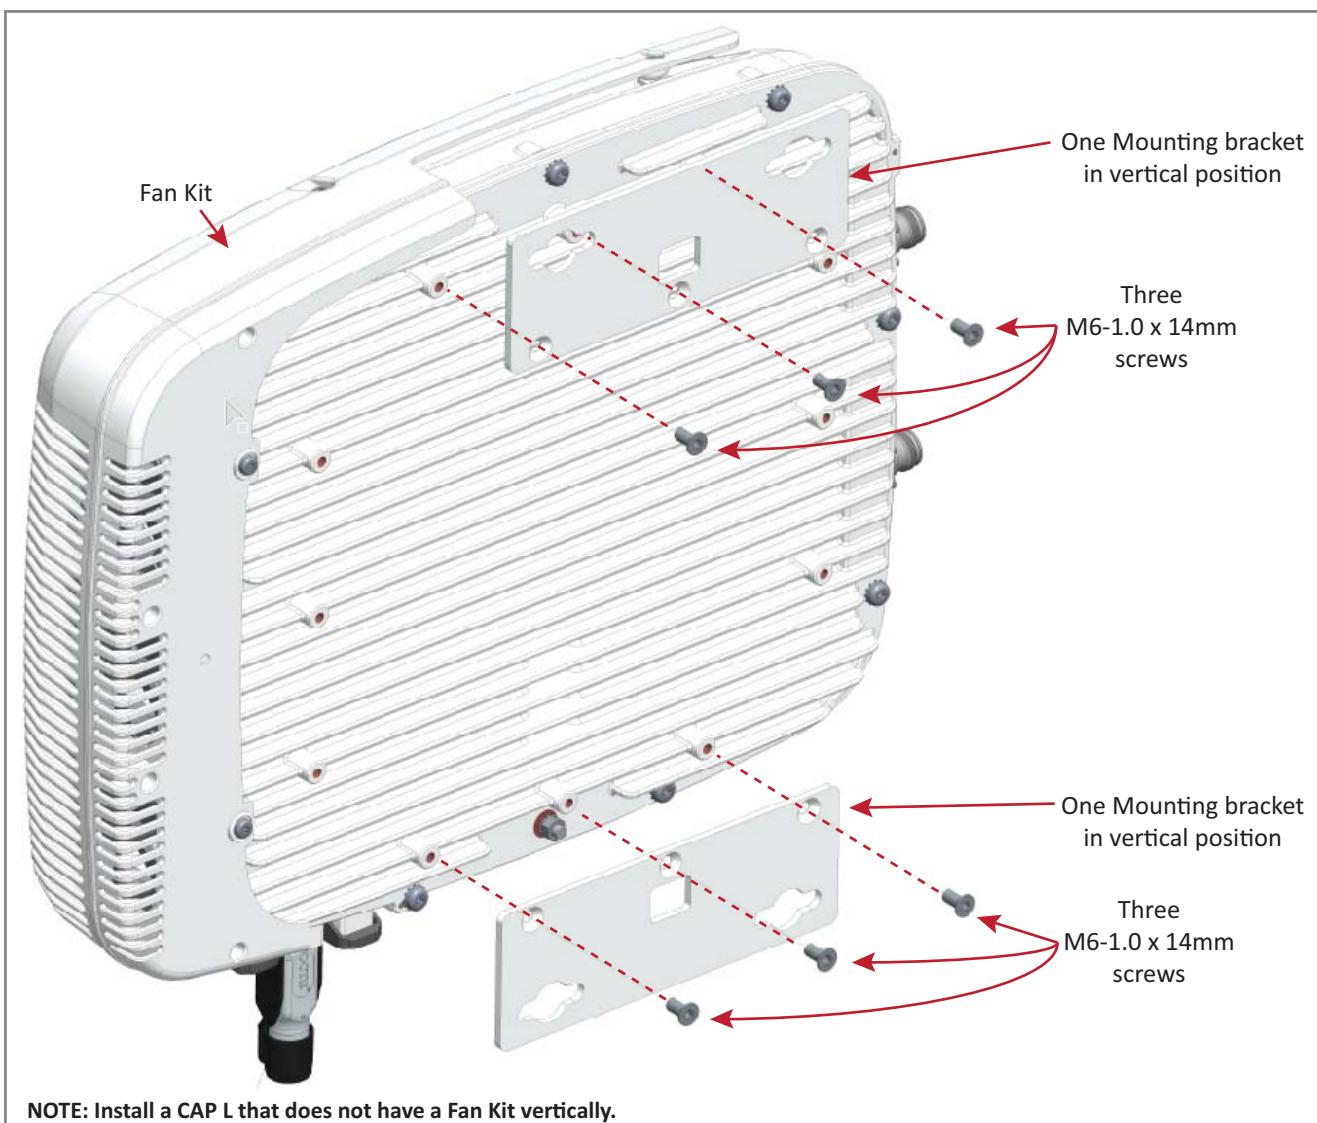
CAP L with a Fan Kit and Flat Mounting Bracket Kit (PN 7774353-xx)
